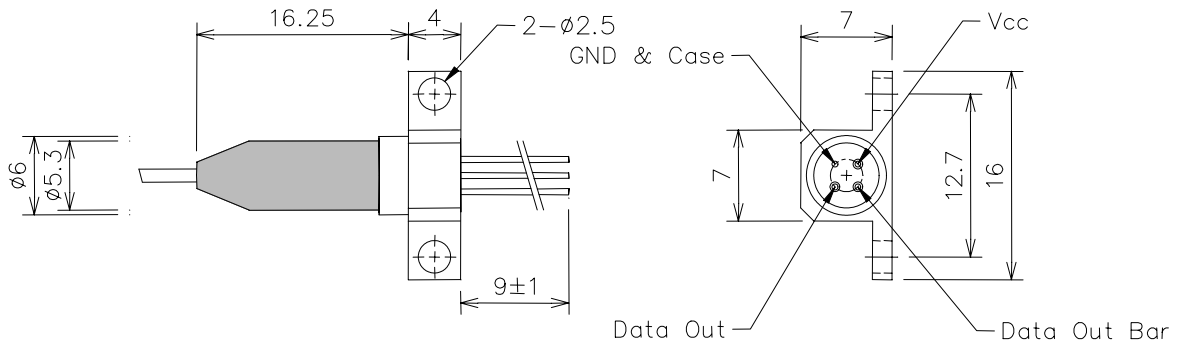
Pigtailed PD-TIA Package Dimensions [unit: mm]
